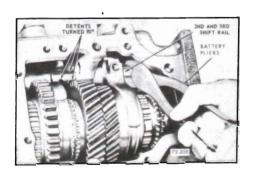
Rotating 2nd-3rd Shift Rail
